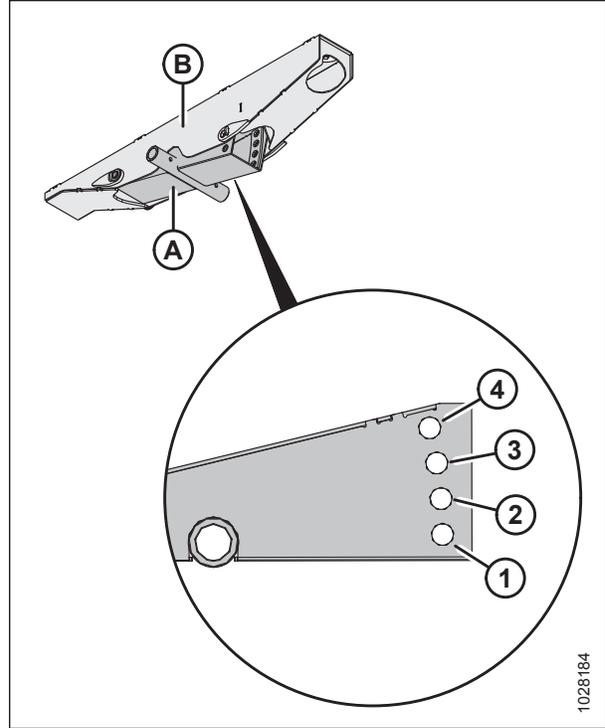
Inboard Wheel Assembly and Left Header Leg – View from Below, Right Opposite
